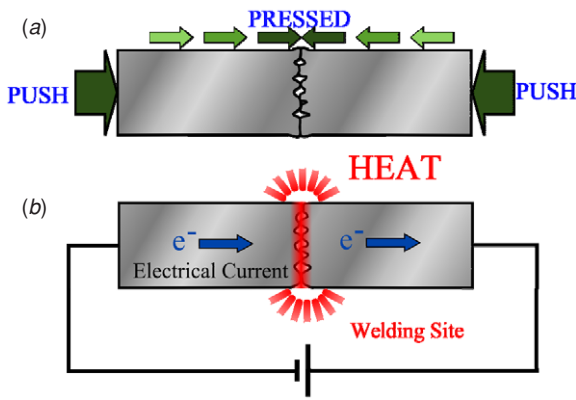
Principle of resistance welding. (a) Two workpieces are pushed into contact with each other. (b) By applying welding current, material around the contact region can be melted due to local joule heating.
